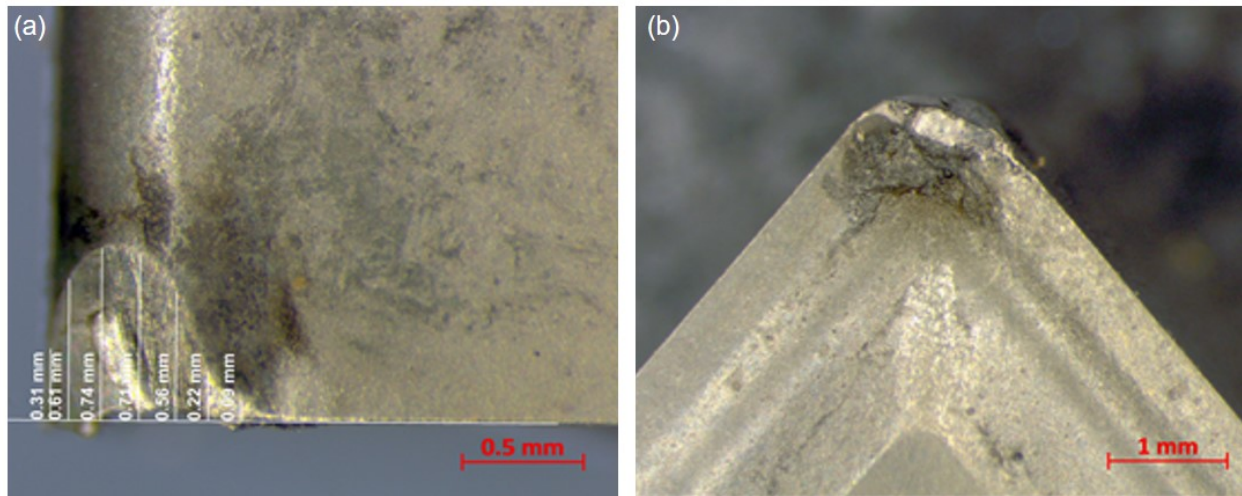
(a) - Annotated photograph indicating the method used to measure flank wear. (b) - a photograph of the worn rake face of the tool. Both photographs were of an insert used to machine Ti-6246 at $V_s = 75$ m/min for 15 min.
